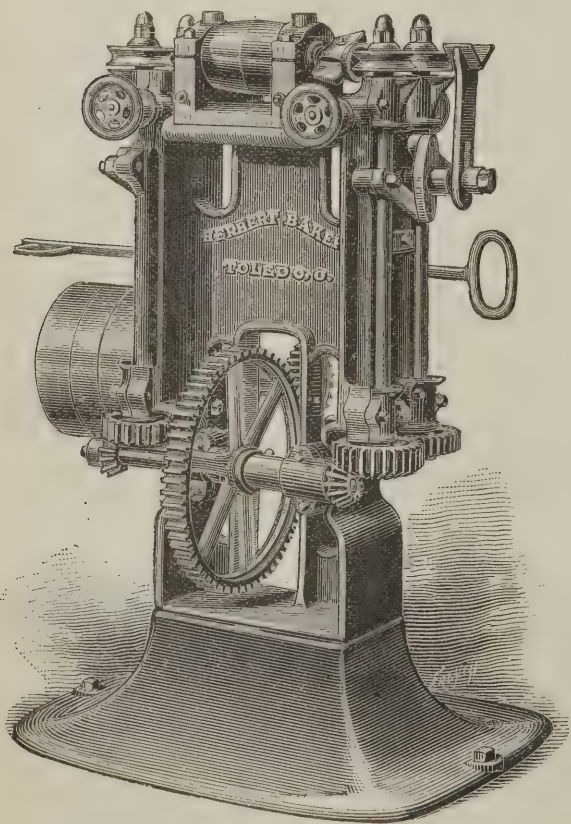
Power Feed Rod, Pin and Dowel Machine.
